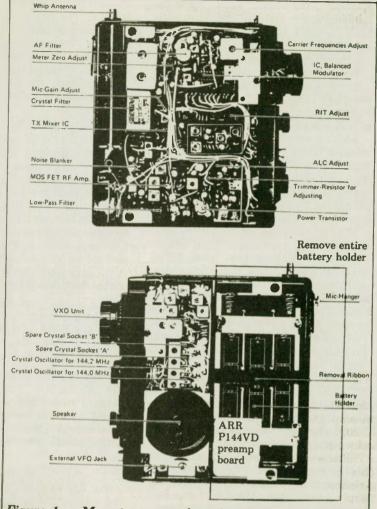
Mount pre-amp board with double-sided sticky tape after battery holder is removed.
